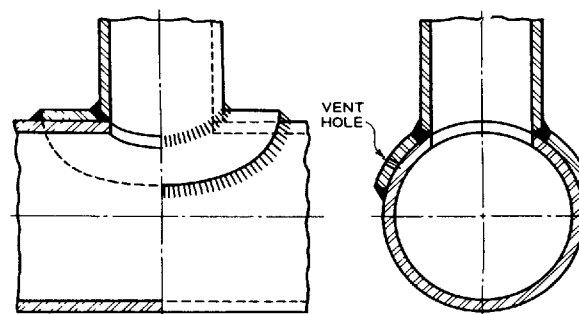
B TYPICAL WELDED BRANCH CONNECTION WITH ADDITIONAL REINFORCEMENT
